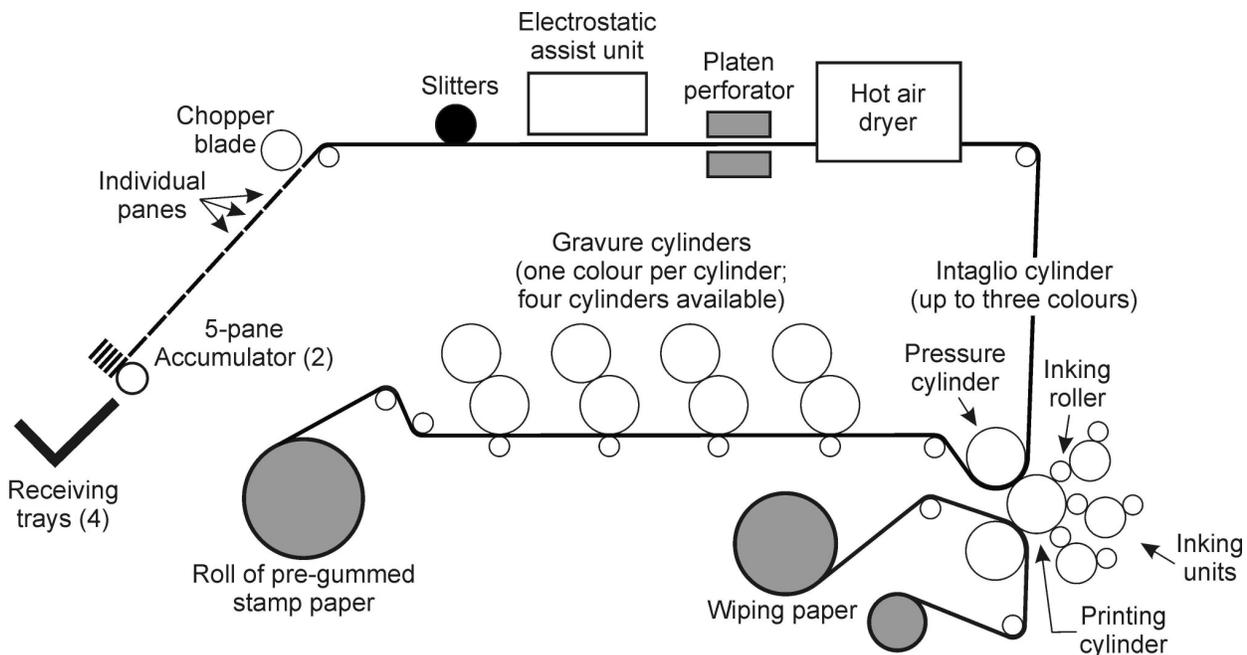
Sketch of the Goebel press layout. The roll of stamp paper is fed through the gravure and intaglio units. The web then travels to the top of the press where the ink is dried, and the web is perforated, slit into rolls, and, for sheet stamps, cut into individual panes.
